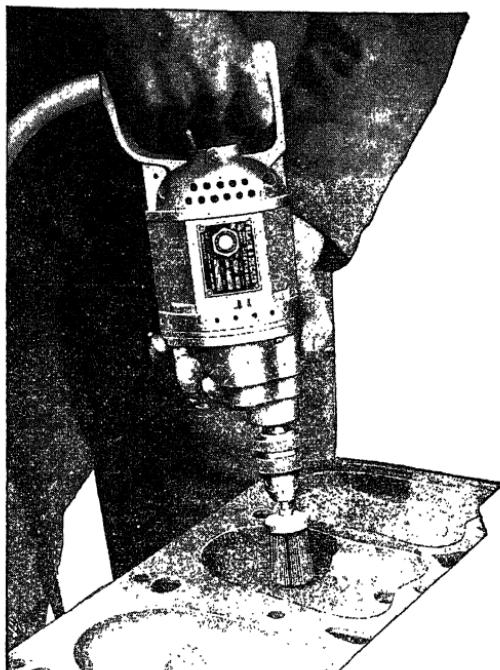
Using Electric Drill and Wire Brush to Remove Carbon from Cylinder Head
